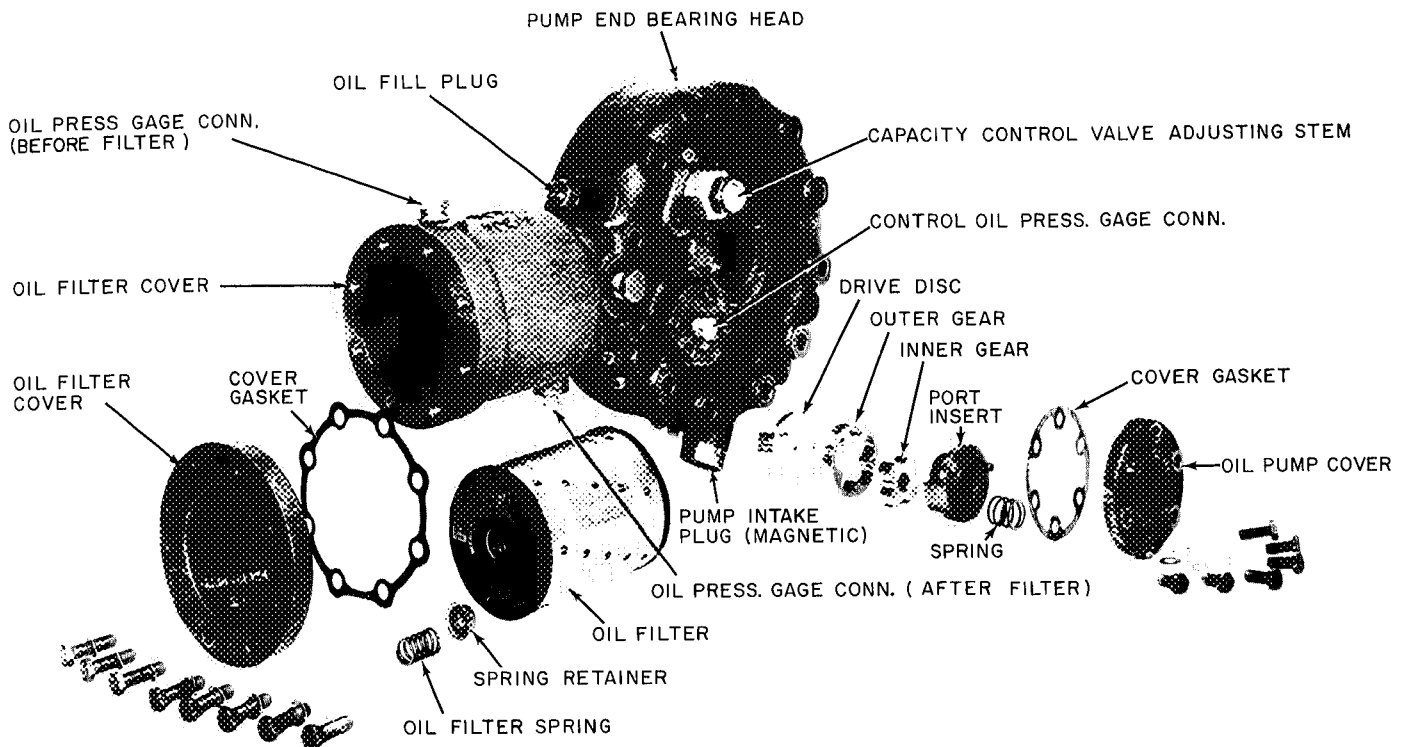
Oil Pump and Filter Assembly (5H120,126)
